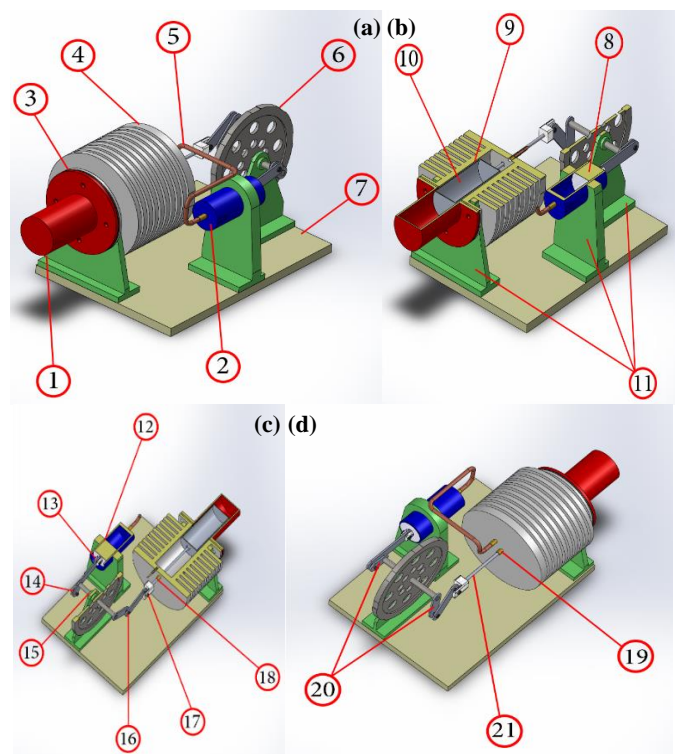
(a) and (d) Engine main components; (b) and (c) Sectional views of the engine
